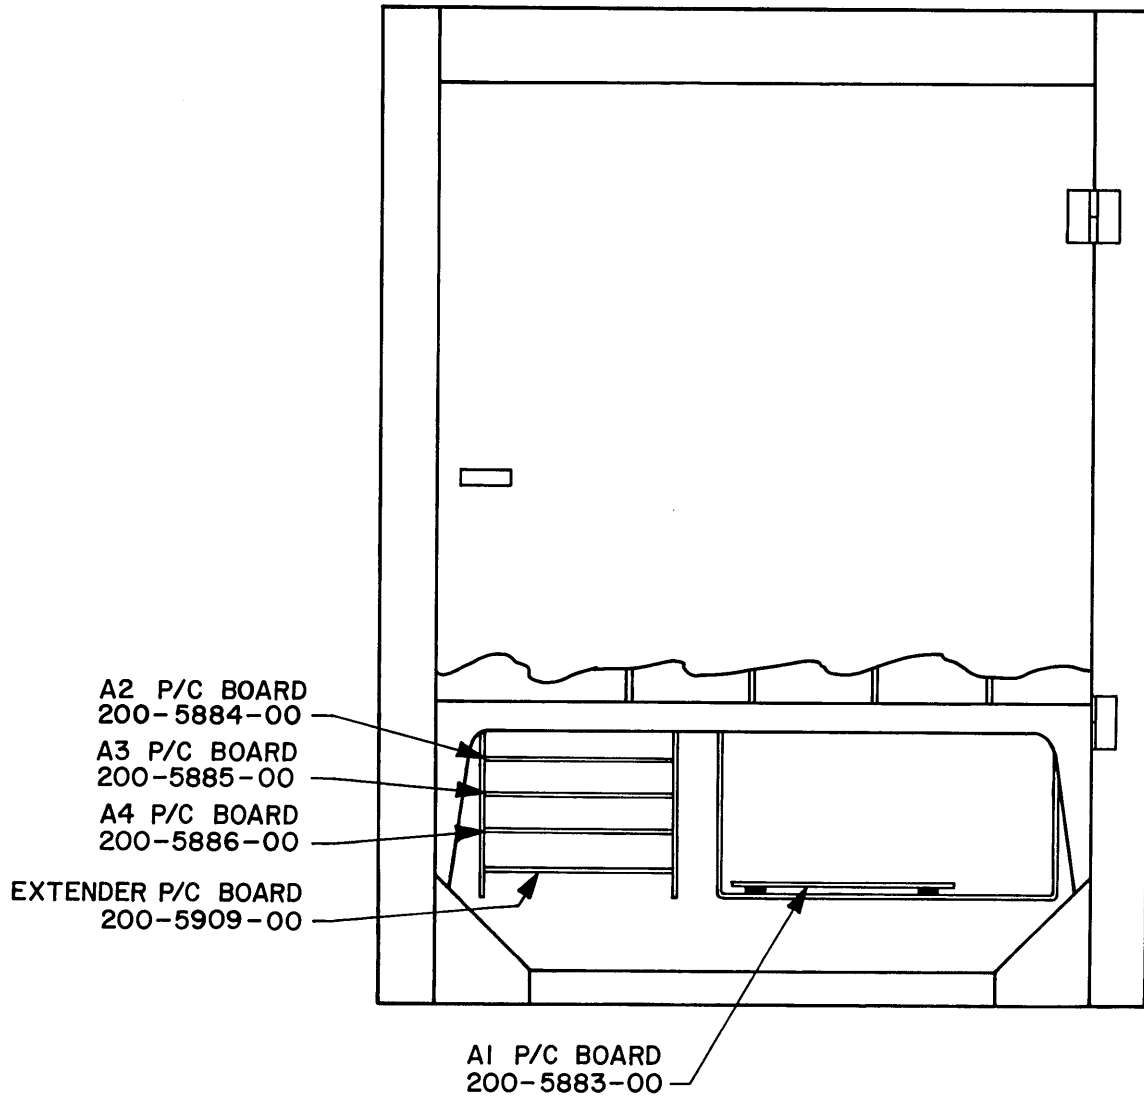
MASTER PANEL DISASSEMBLY
